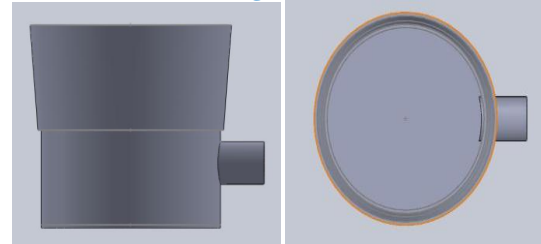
Air Inlet Pipe at 0° Cooling Tower Model
